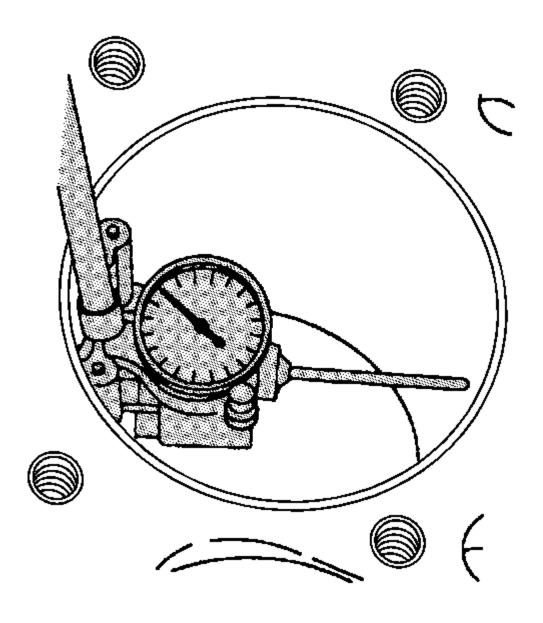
Measuring Cylinder Bore Courtesy of GENERAL MOTORS CORP.
